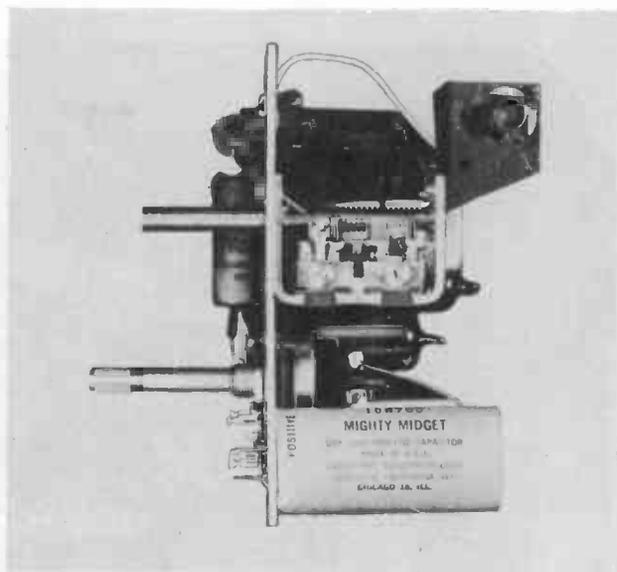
Side View of Motorola Radio Chassis Illustrating Thinness of Chassis Base.
